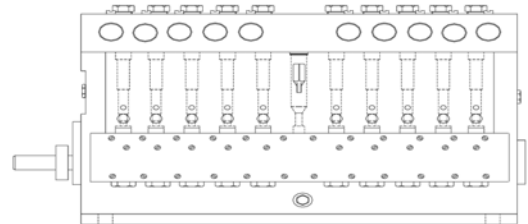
Cylinder lubricator for RTA48T diesel engine
